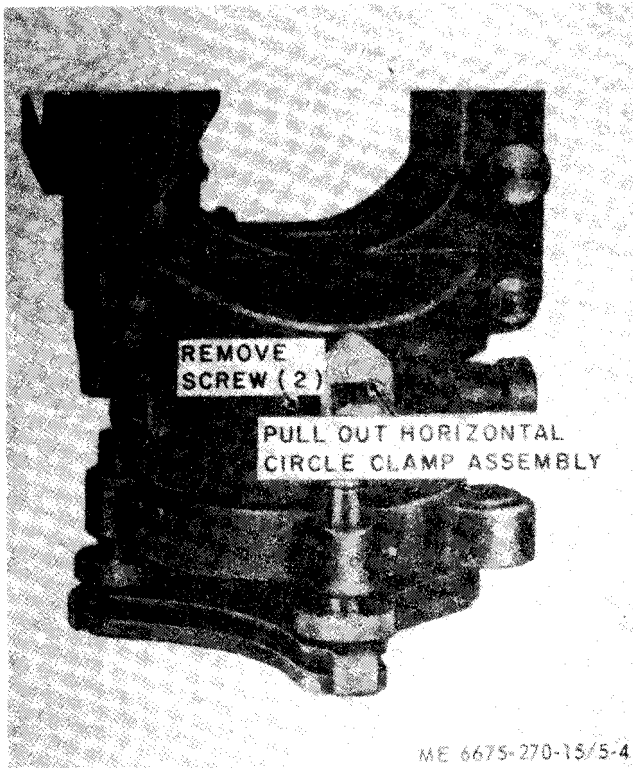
Horizontal circle clamp assembly, removal and installation.
